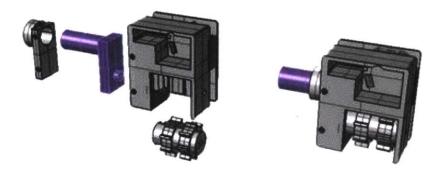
Exploded CAD drawing of Zipperbot components (left) and then assembled (right) as rendered in Rhinoceros.
